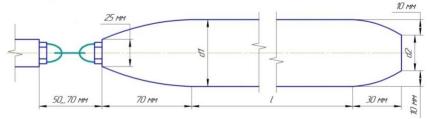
Scheme of the expander for the mole maker No. 1 of a cone-cylindrical shape.
